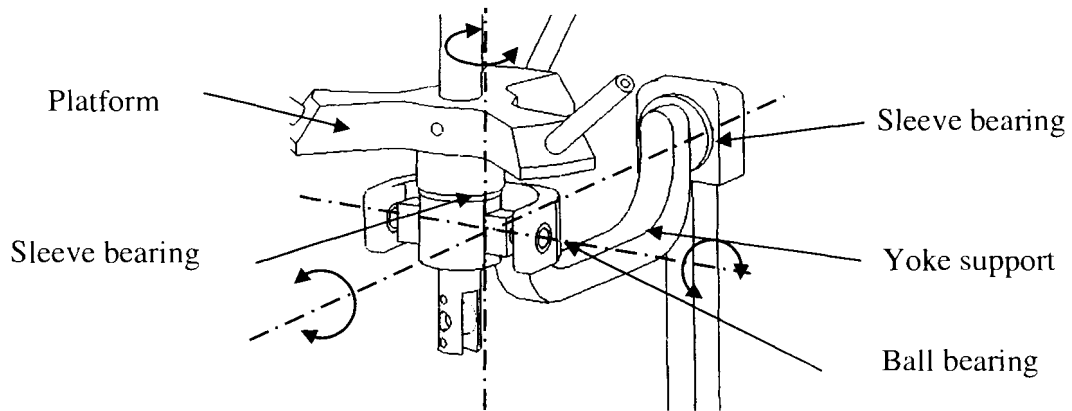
Three rotational DOF yoke type passive supporting mechanism
